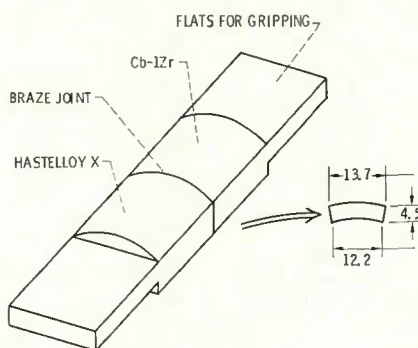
Transverse tensile specimen from brazed pipe joint; dimensions are in mm
